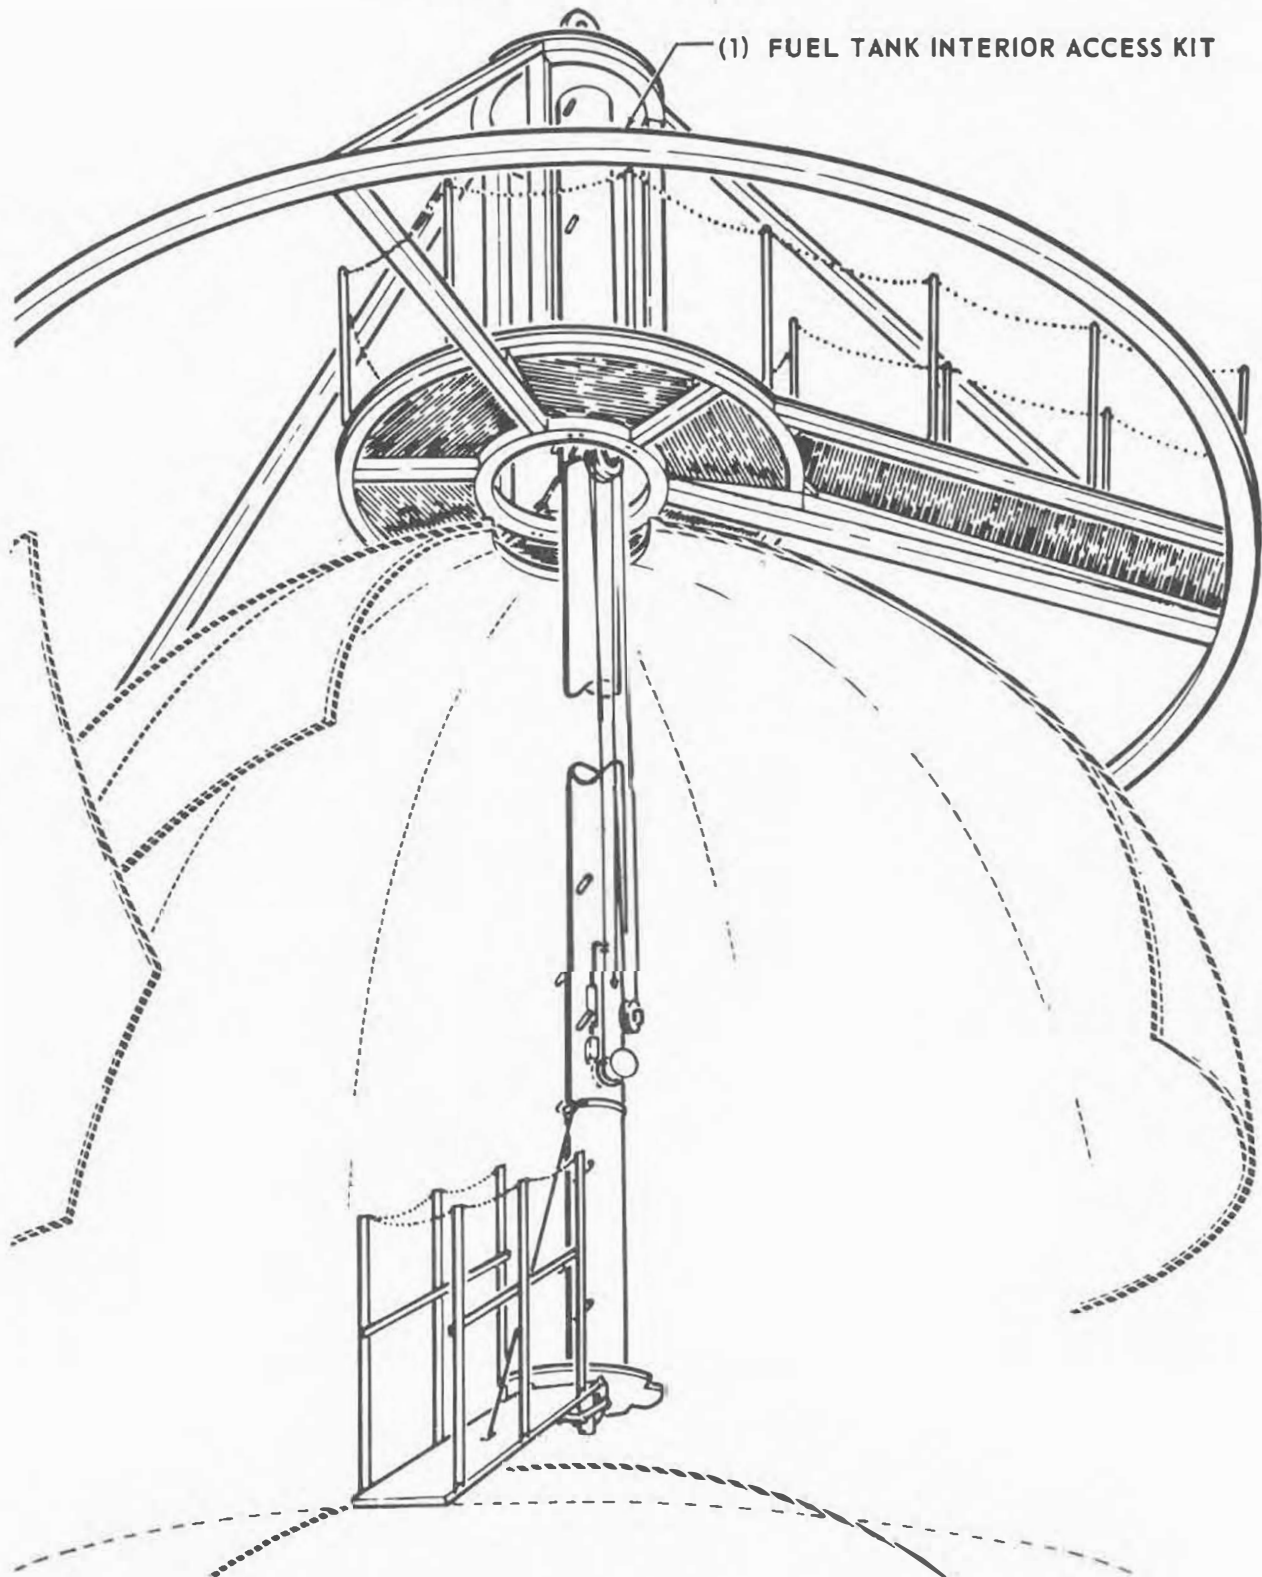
S-IVB Access Equipment (Sheet 1 of 4)
